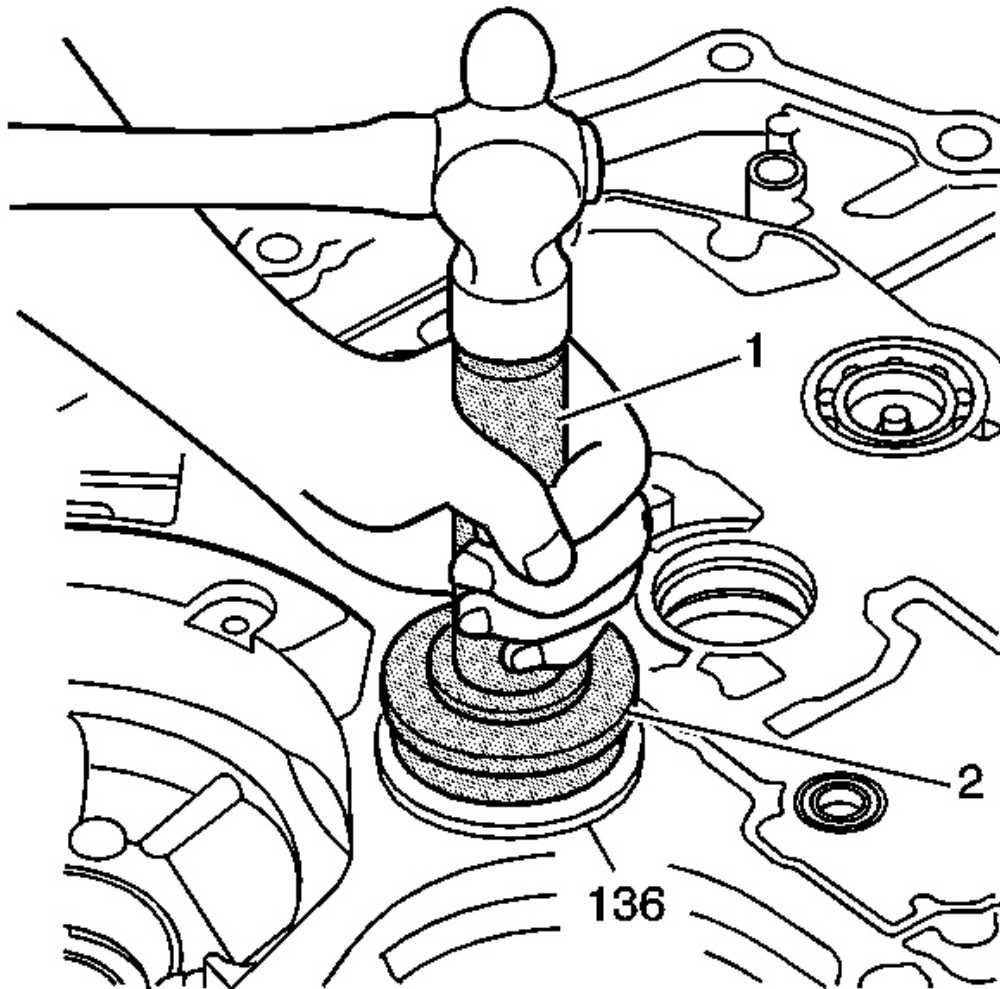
Installing The Output Shaft Front Bearing Using DT 46412 & EN 46342
